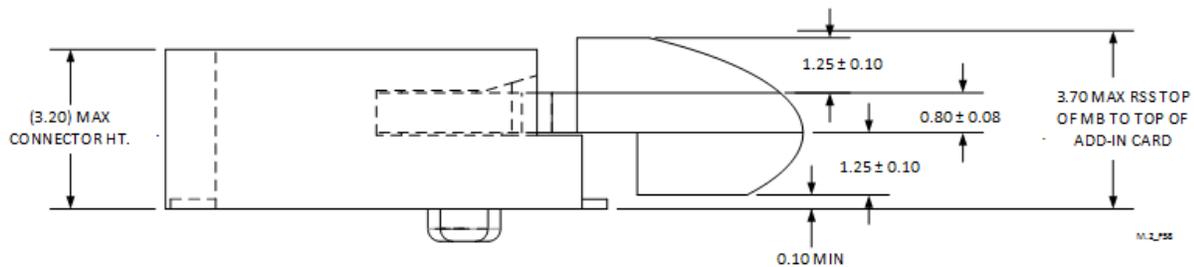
H3.2-D2 – Stack-up Top Mount Double-sided Add-in Card for 1.35 Maximum Top-side Component Height
